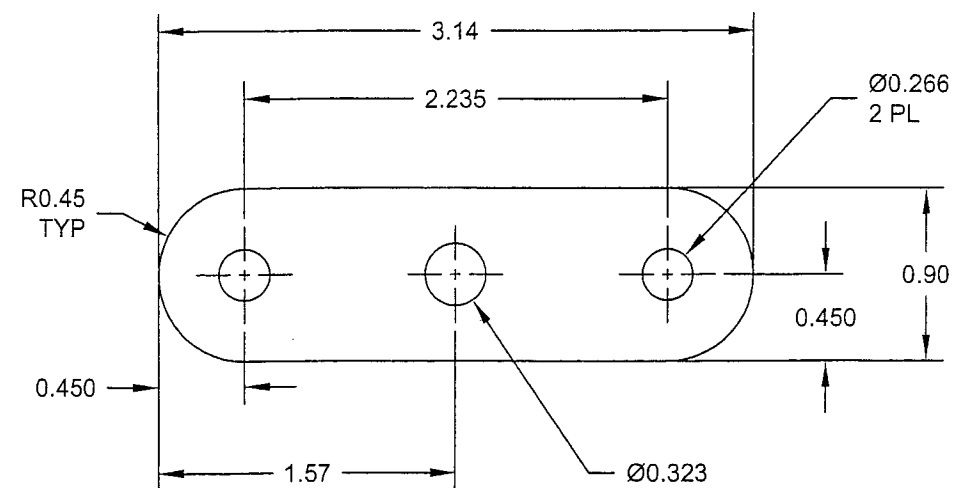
DETAIL D: HOOP & HINGE PLATE DETAIL
